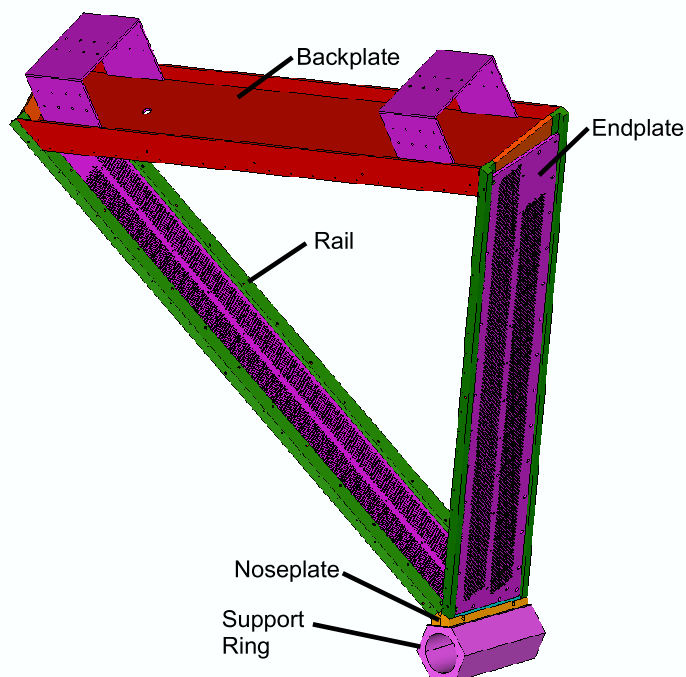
Assembly drawing showing the key elements of the drift chamber box. Gas window, electronic boards, and cables not shown.
